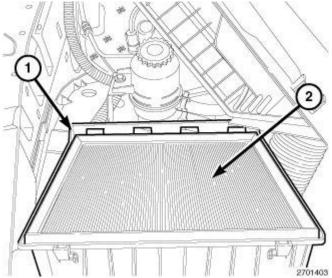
AIR CLEANER HOUSING & AIR CLEANER FILTER Courtesy of CHRYSLER LLC
